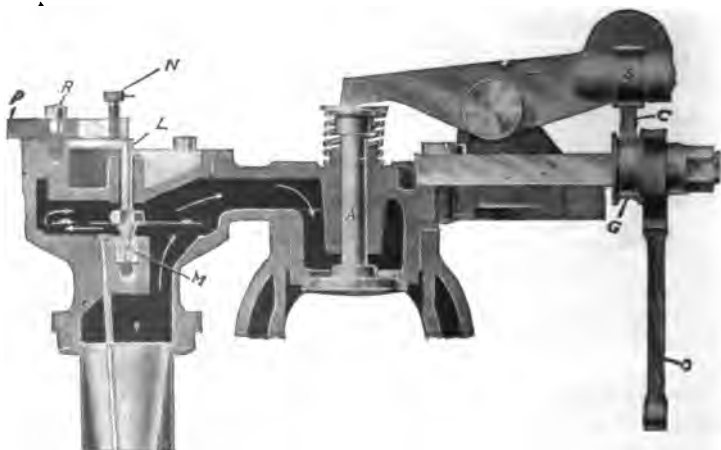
Carburettor and Intake Valve Mechanism of the Cadillac Motor. L is the gasoline valve; M, the gasoline inlet; N, the adjusting screw. A is the inlet valve; T, the walking-beam for opening it under positive impulse; C, the end of the eccentric rod, raising T by bearing on roller, S, with roller, G, as fulcrum. O is the handle by which the position of G, consequently the lift of the valve, A, may be varied as desired.
